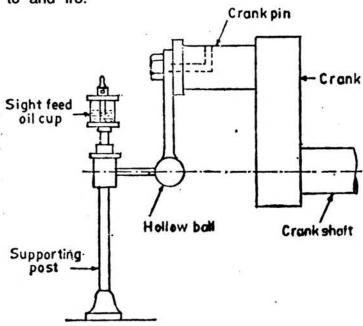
Banjo type crank pin oiler for side-crank engine.
